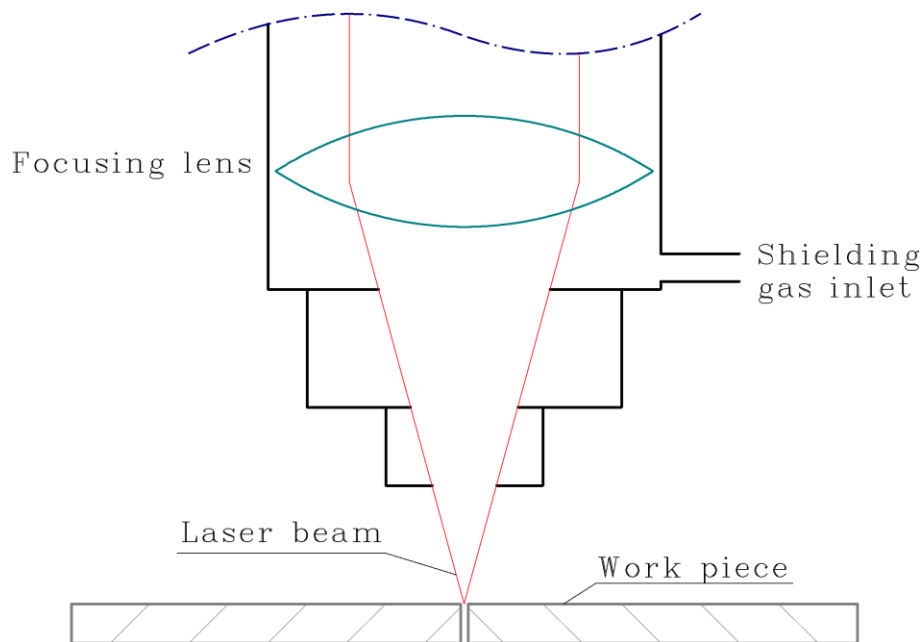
Schematic of general Laser Beam Welding configuration
